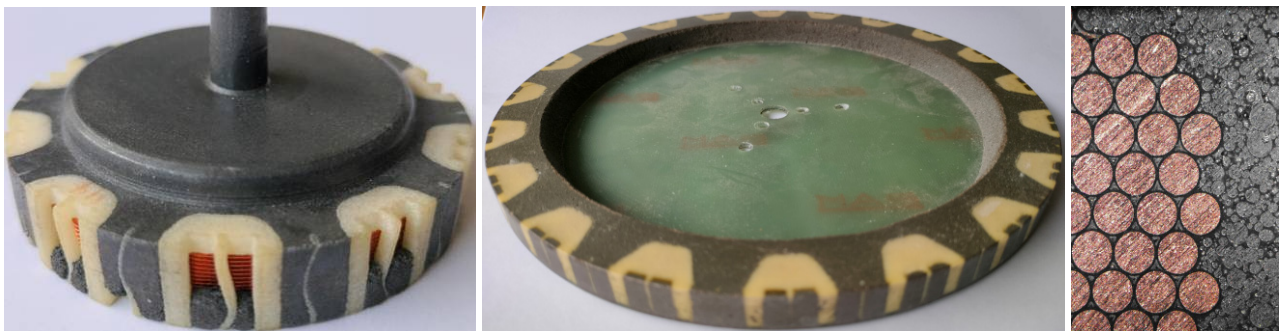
Injection molding test (D1, left), rotomolded stator (D2, middle), cross-section of the molded winding (right)
